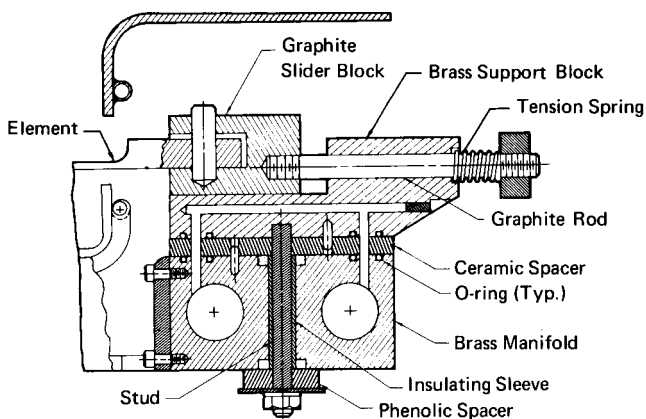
EXPANSION END BLOCK ASSEMBLY
